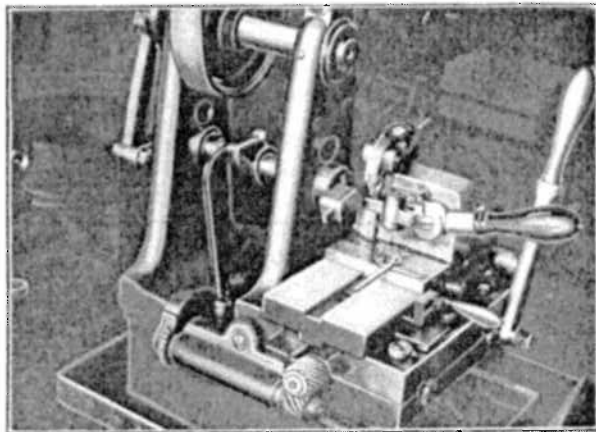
"DIGGING OUT." A METHOD THAT COMPETES WITH MILLING
